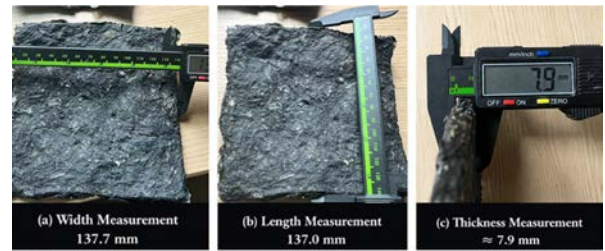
Measurement of specimen dimensions using a digital caliper: (a) width, (b) length, and (c) thickness.
